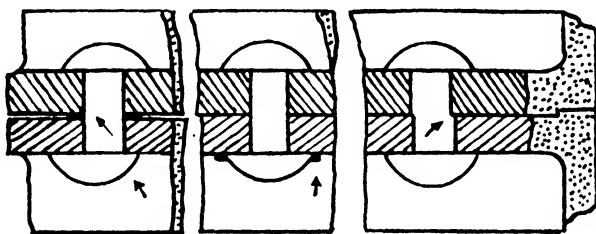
EXAMPLES OF DEFECTIVE RIVETING
